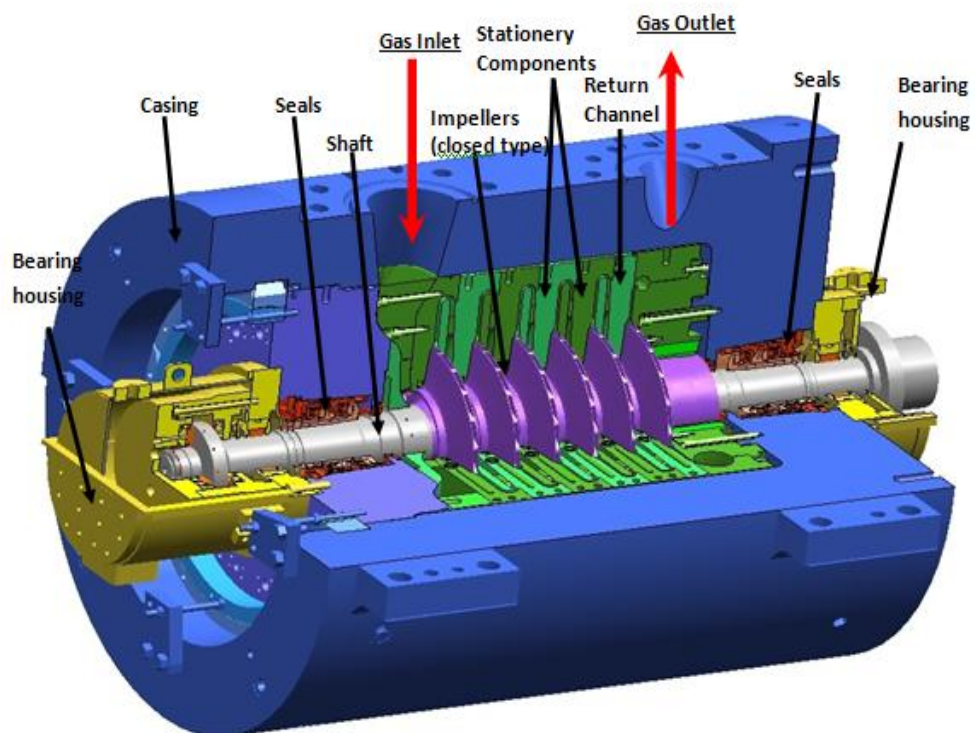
C. A close up to the internal parts of a centrifugal (barrel type) compressor [Ref. 60]
